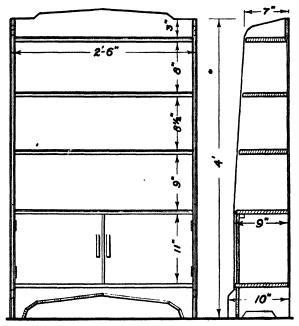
Front Elevation and Side Section with Chief Sizes.
